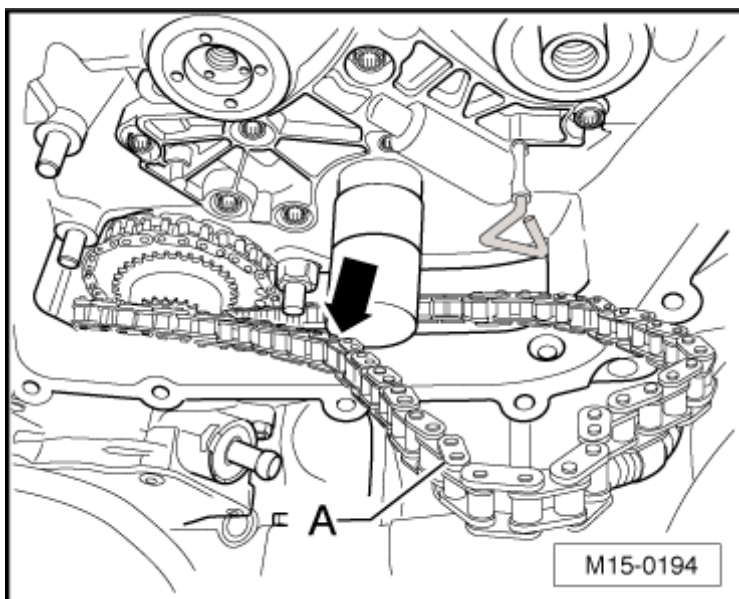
Identifying Timing Chain Held To Lay It Under Pipe Connection
